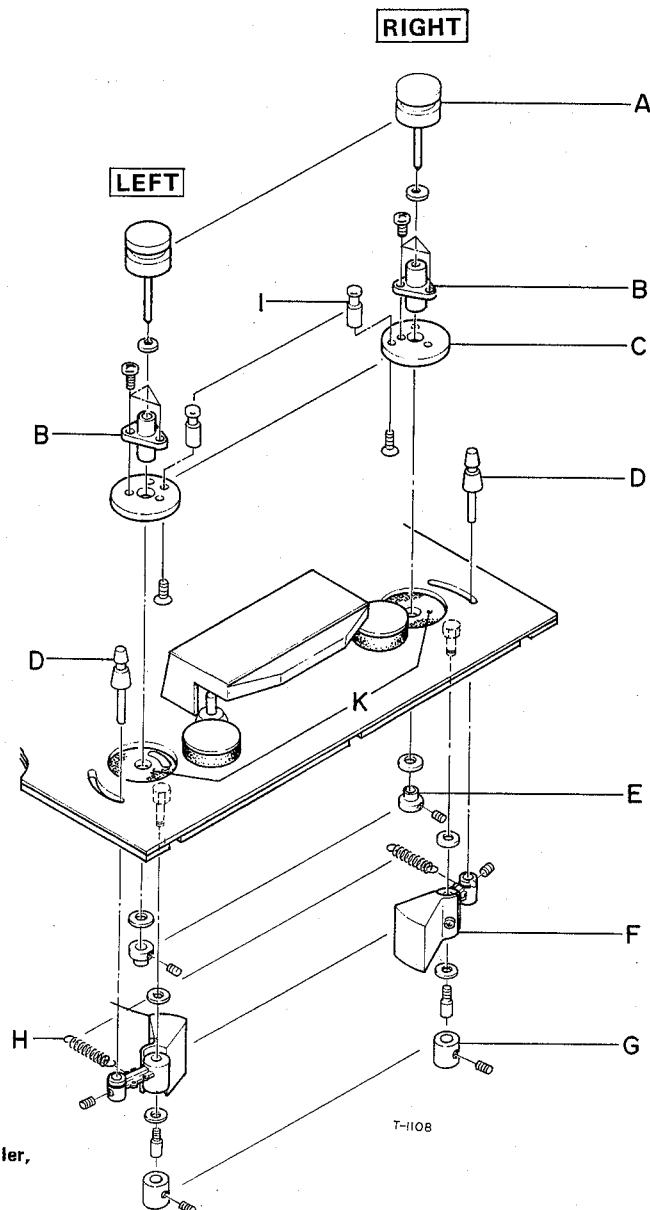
Tension Arm, Guide Roller, Metal Holder Ass'y and Right Pole Removal
